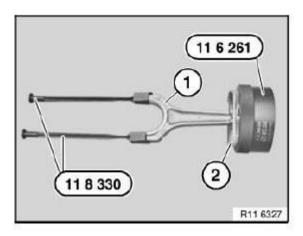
Attaching Special Tool In Connecting Rod Courtesy of BMW OF NORTH AMERICA, INC.
